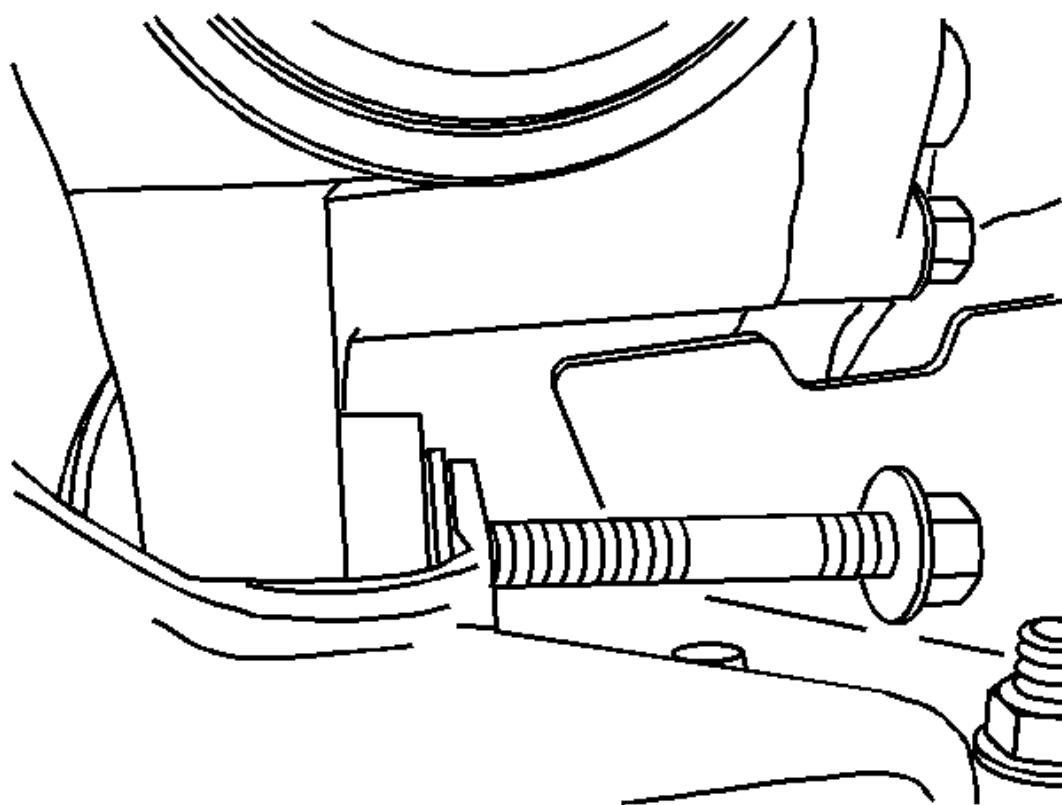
View Of Differential Carrier Lower Mounting Bolt
